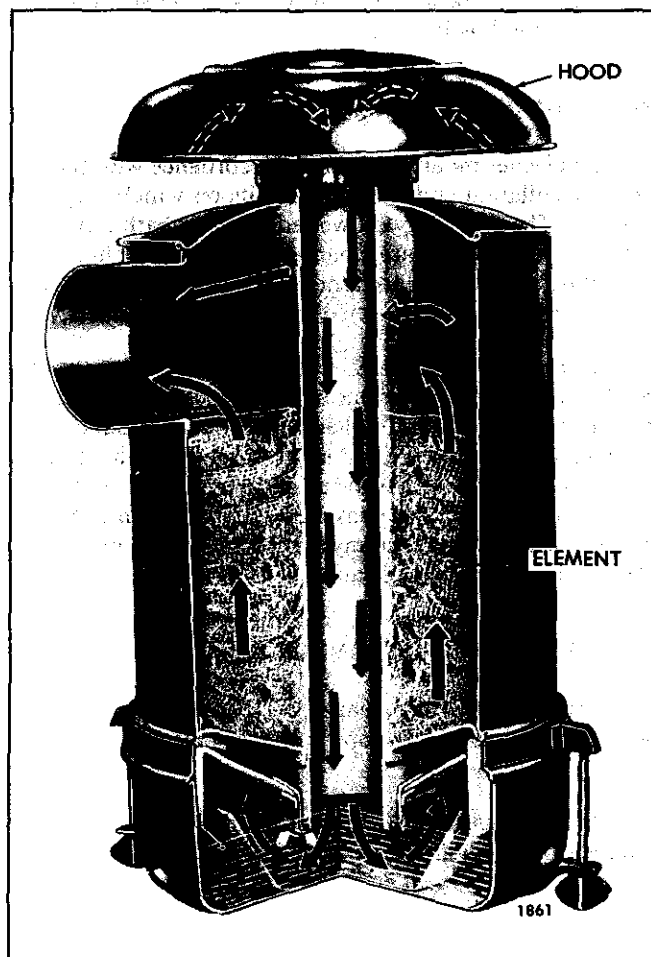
Heavy Duty Oil Bath Type Air Cleaner
